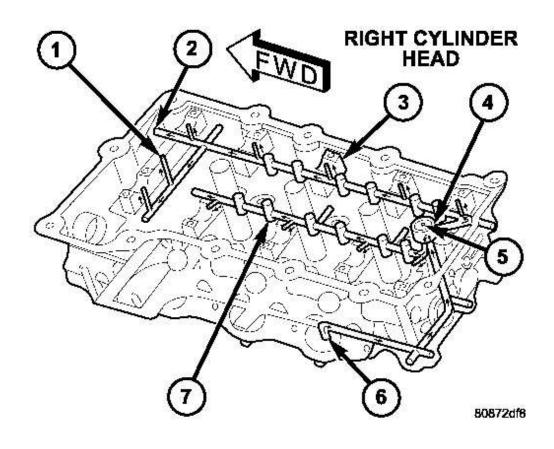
Identifying Cylinder Head Oil Lubrication System - Right Side Courtesy of CHRYSLER LLC
